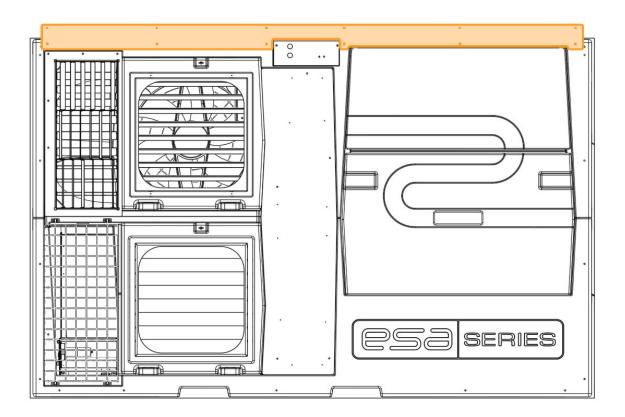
Alignment of flange #1 cutouts with the heat exchanger
